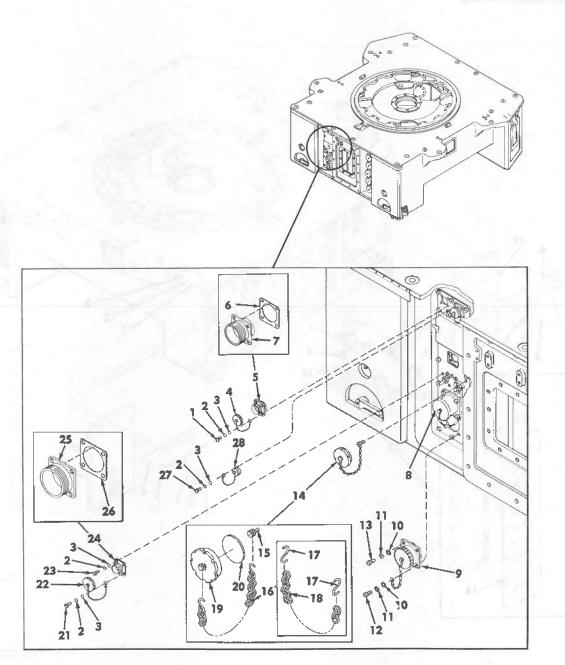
EQUIPMENT ENCLOSURE. AZIMUTH ORIVE /9136465/-PARTIAL EXPLCDED VIEW
